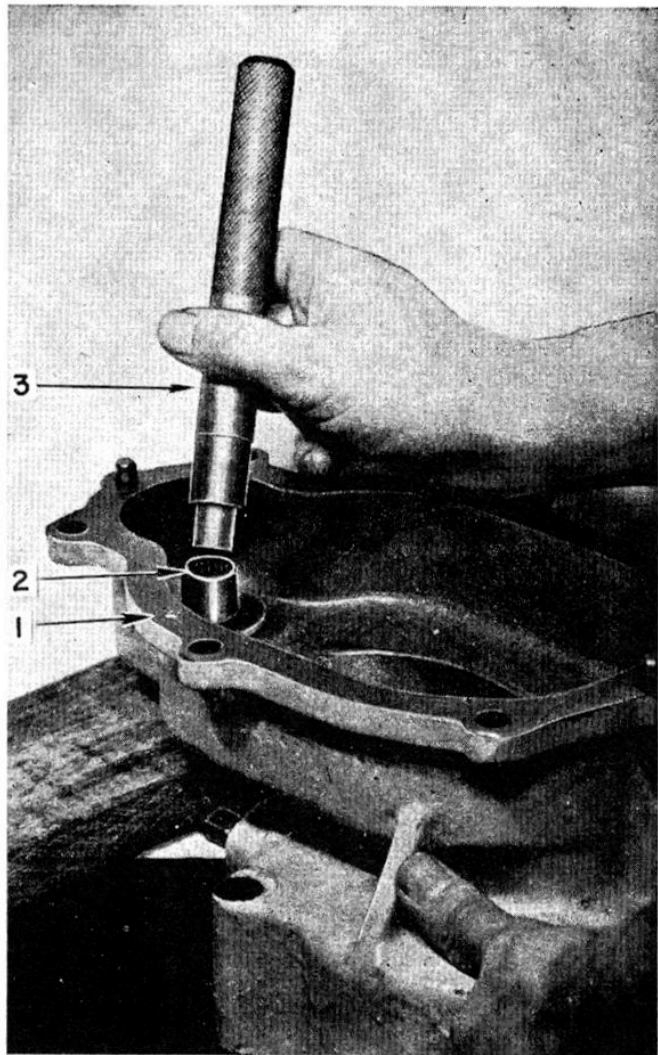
INSTALLING MAGNETO DRIVESHAFT BEARING IN CRANK CASE
